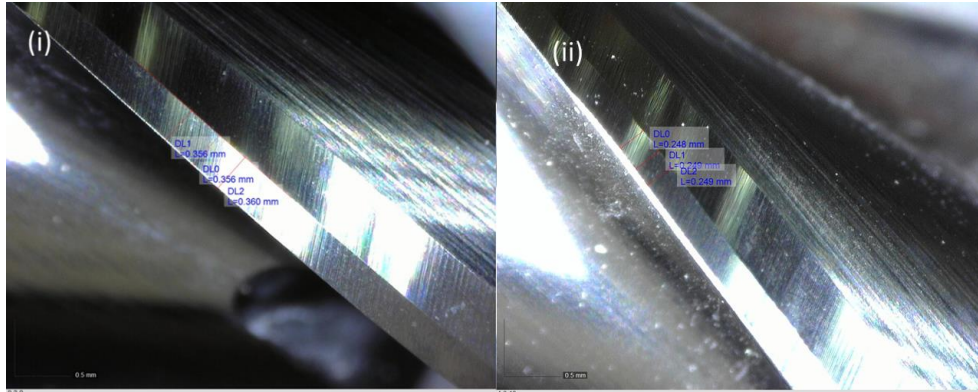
(i) Fresh cutting tool (ii) the flank wear after milling with 170 m/min for 6000 mm machining length in dry condition.
